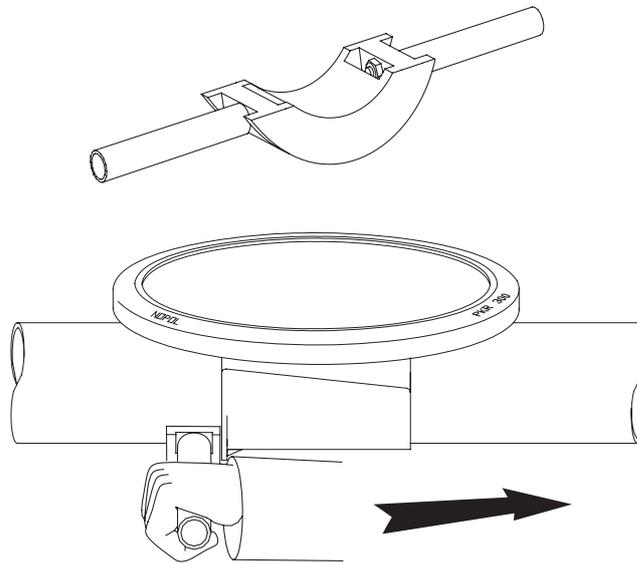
Removing the PIK 300 diffuser with the help of the TWP tool
